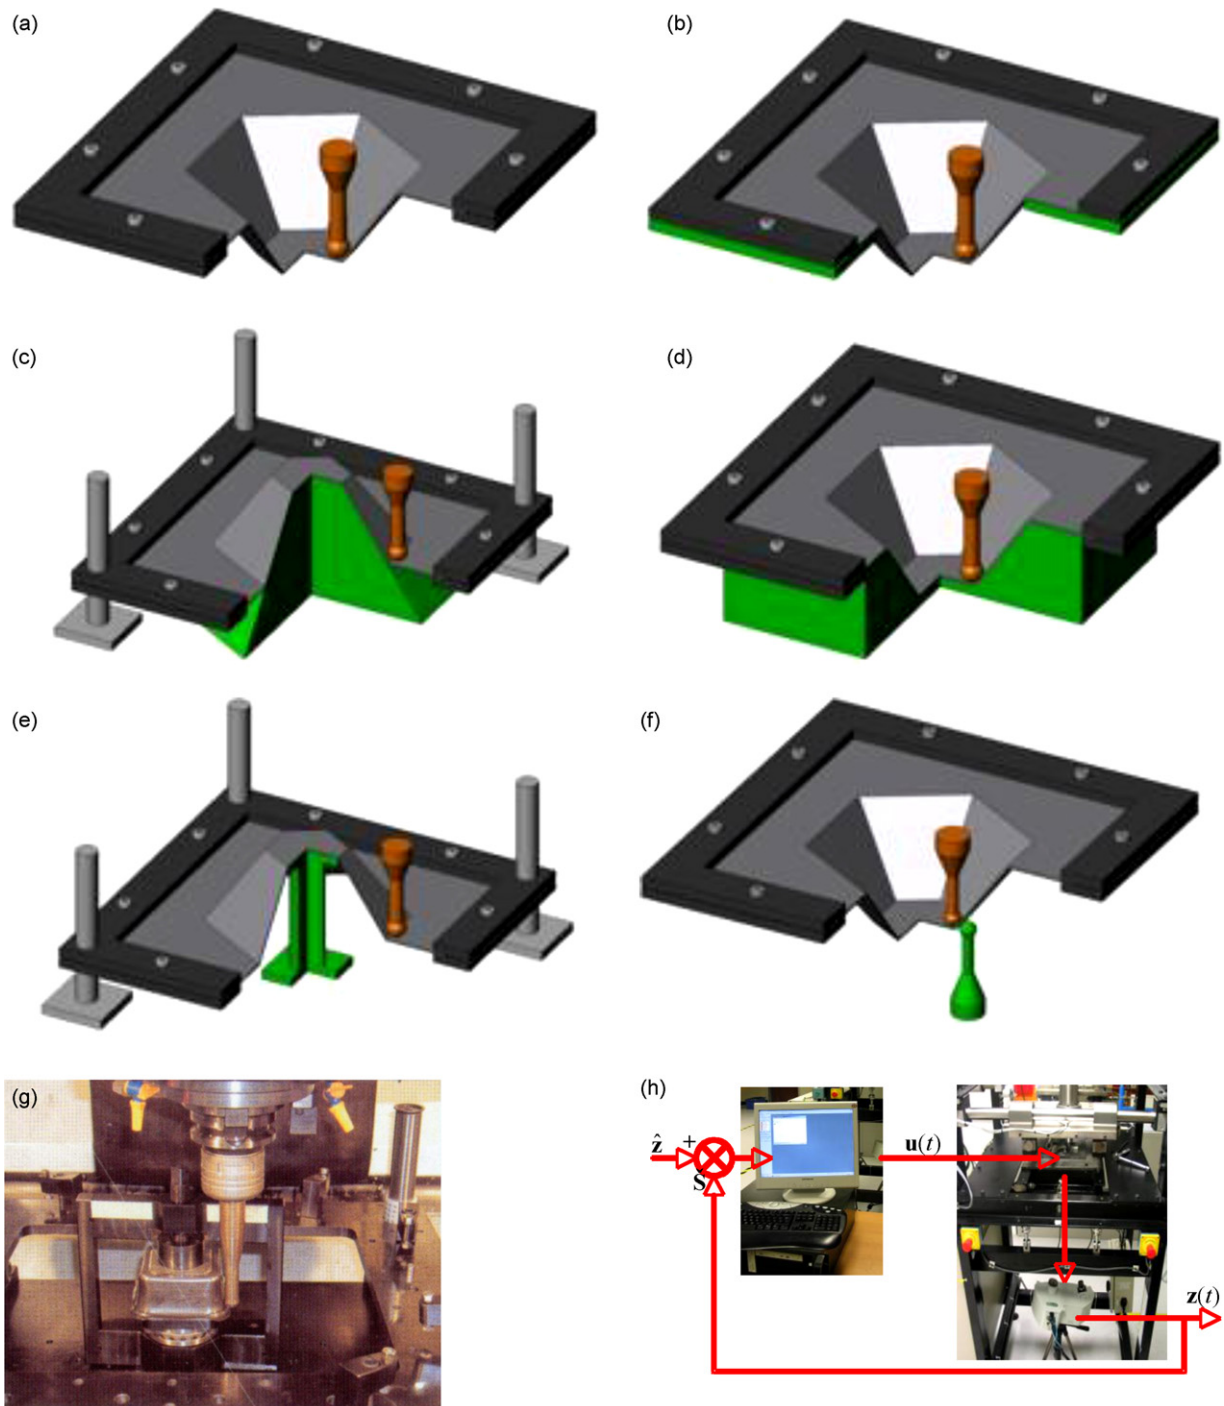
Variants of the incremental sheet forming process designed to improve accuracy. (a) The simplest process. (b) Use of a backing plate with cut-out. (c) Forming over a male die. (d) Forming into a female die. (e) Two point forming, static lower tool. (f) Two point forming, both tools moving. (g) Male die with free edges. (h) Closed-loop feedback control.
